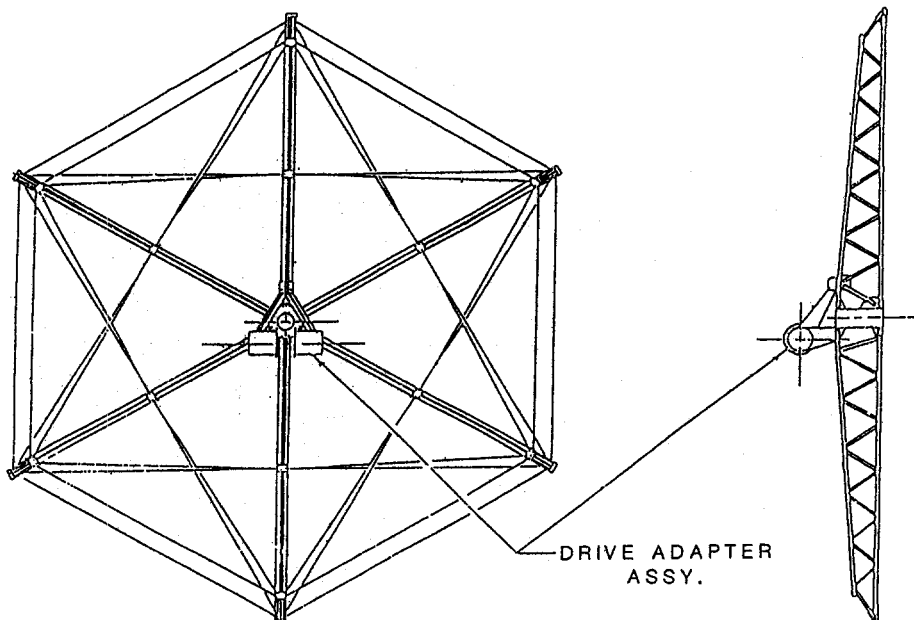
Rear Structure and Drive Adapter of the Prototype Heliostat.
